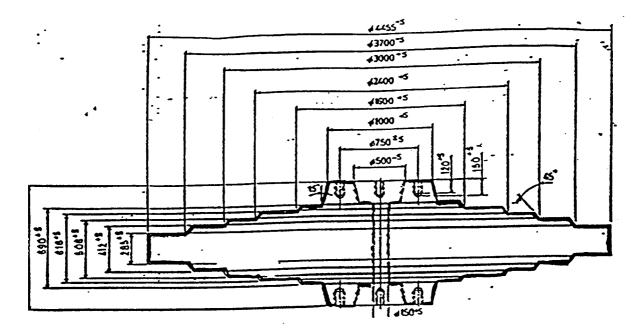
Pre-machined iron core for 120cm beam radius magnets.
